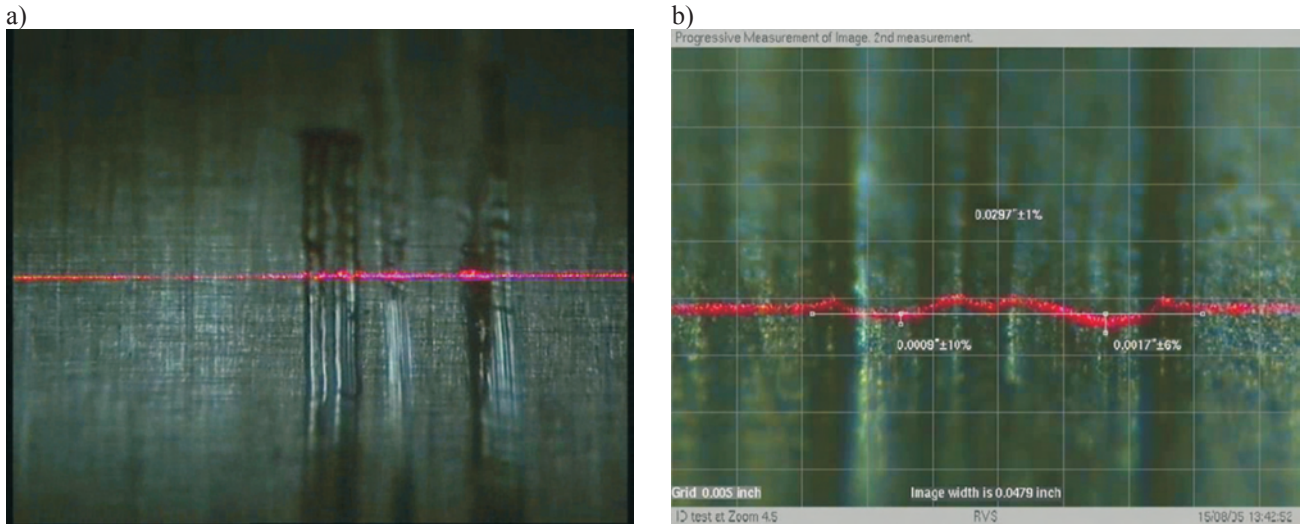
Measurement of surface defects (traces of friction) with the use of scanning laser method SMDS [7]: a) laser beam scanning the surface, b) measurement of the surface deformations (surface indentations and bulges) by a laser method
